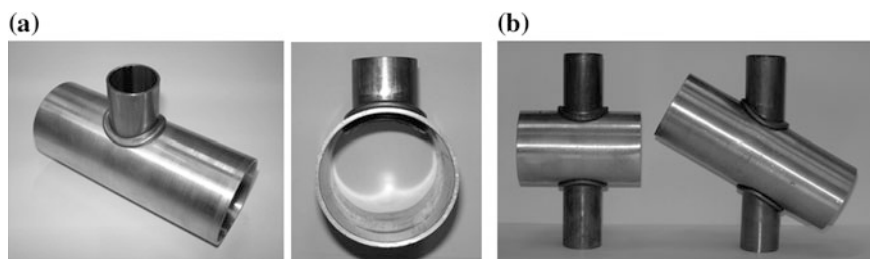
Application of the new proposed joining technology for connecting tubes at different inclination angles
